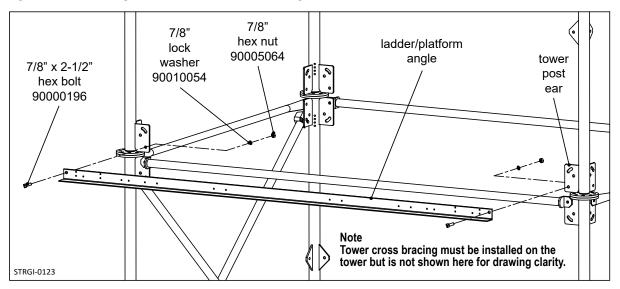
Installing Mid Angles to Platform Mounting Brackets. Installing Platform Mounting Brackets to Tower Posts.
